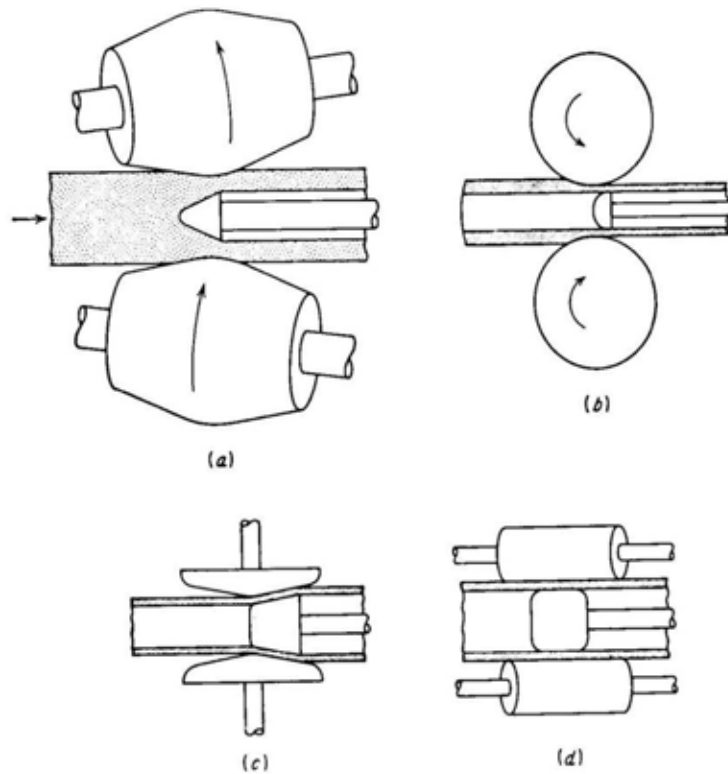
(a) Mannesmann mill (b) plug rolling mill
